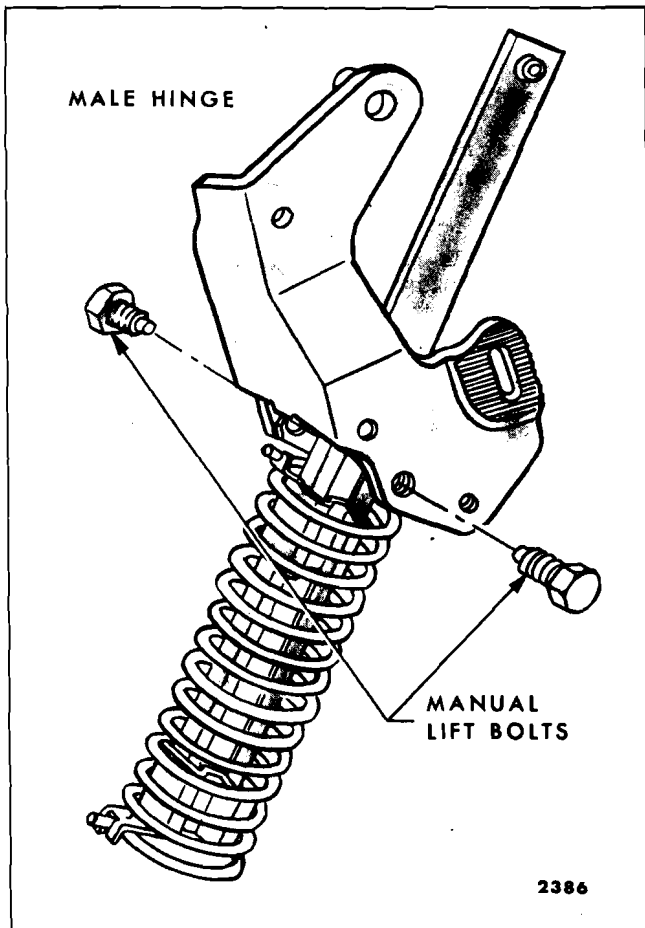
Folding Top Manual Lift Attachment - "F" Styles
